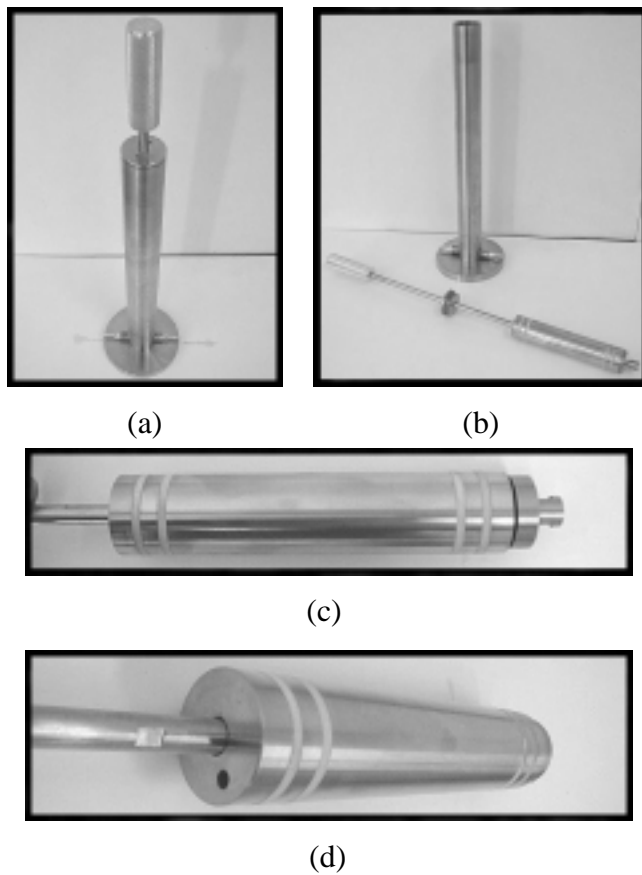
The piston CPS without check-valves attached a) shown together, and b) disassembled. c) Close-up of the piston showing the valve in an open position. d) Piston close-up showing the air hole; a second one was added later.
